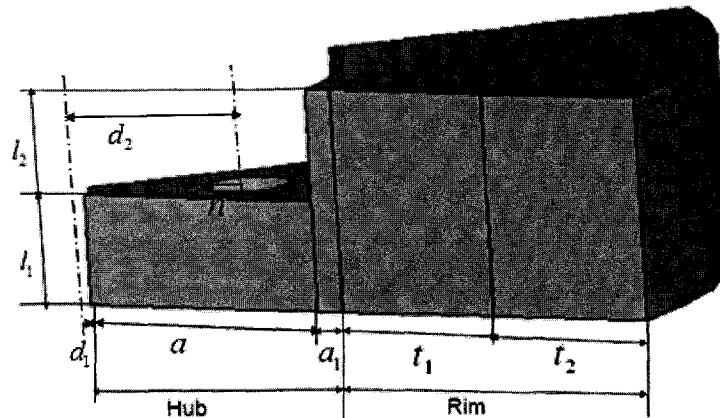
45°-section of hybrid rotor and hub assembly showing geometry parameters and coordinates.
